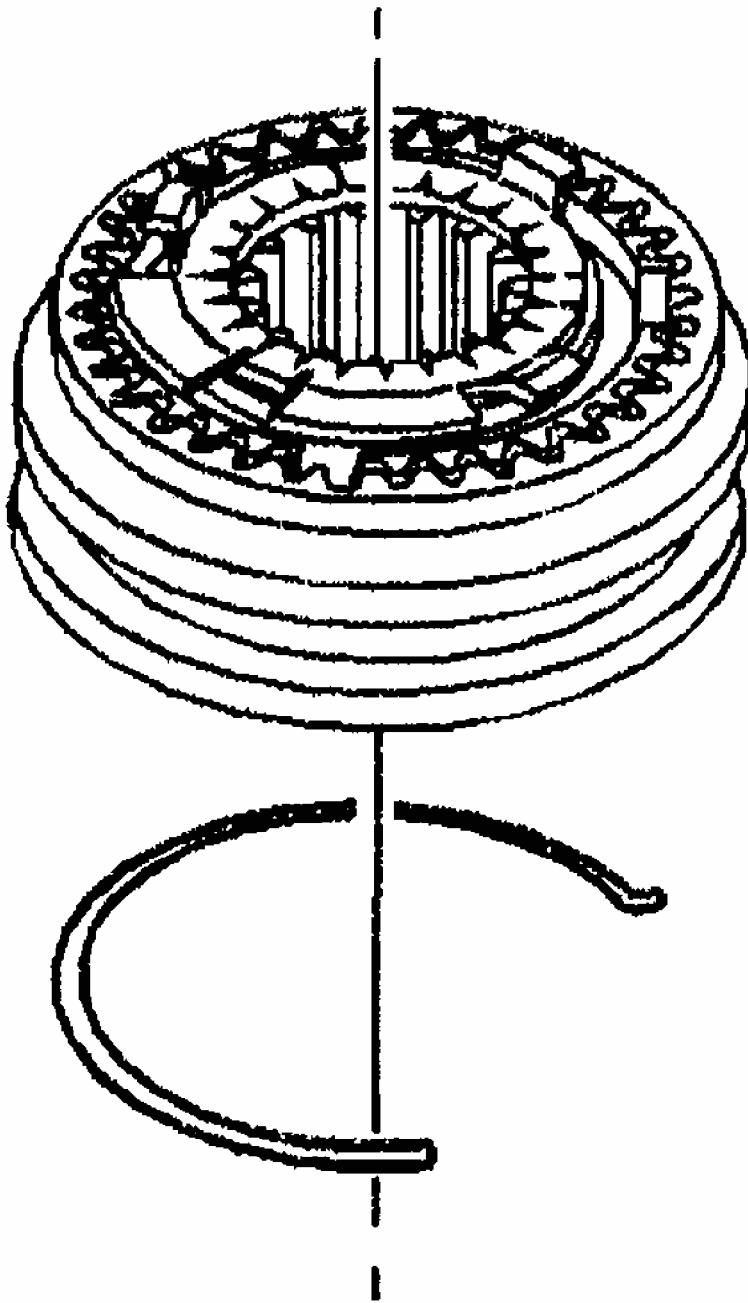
Identifying Marks On Synchronizer Hub & Sleeve
